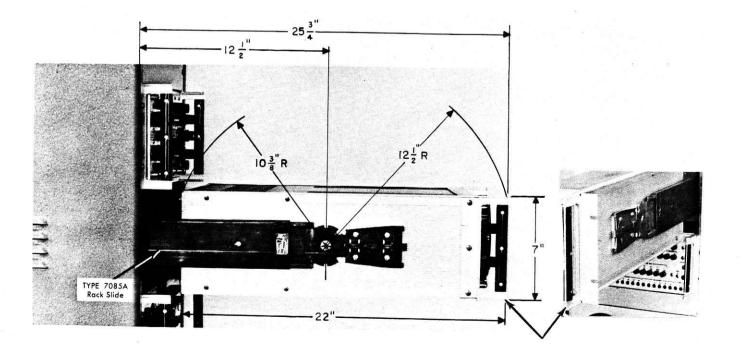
Type 767H Oscilloscope Showing Clearance Dimension for Installation of Type 7085A Rack Slides (Standard Installation)
